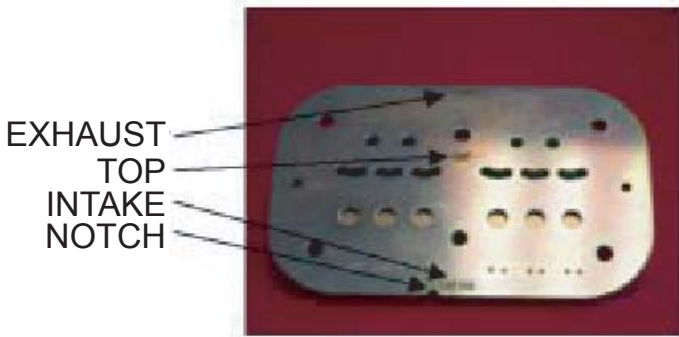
REED VALVE POSITIONED WITH TEXT UP, NOTCH DOWN
